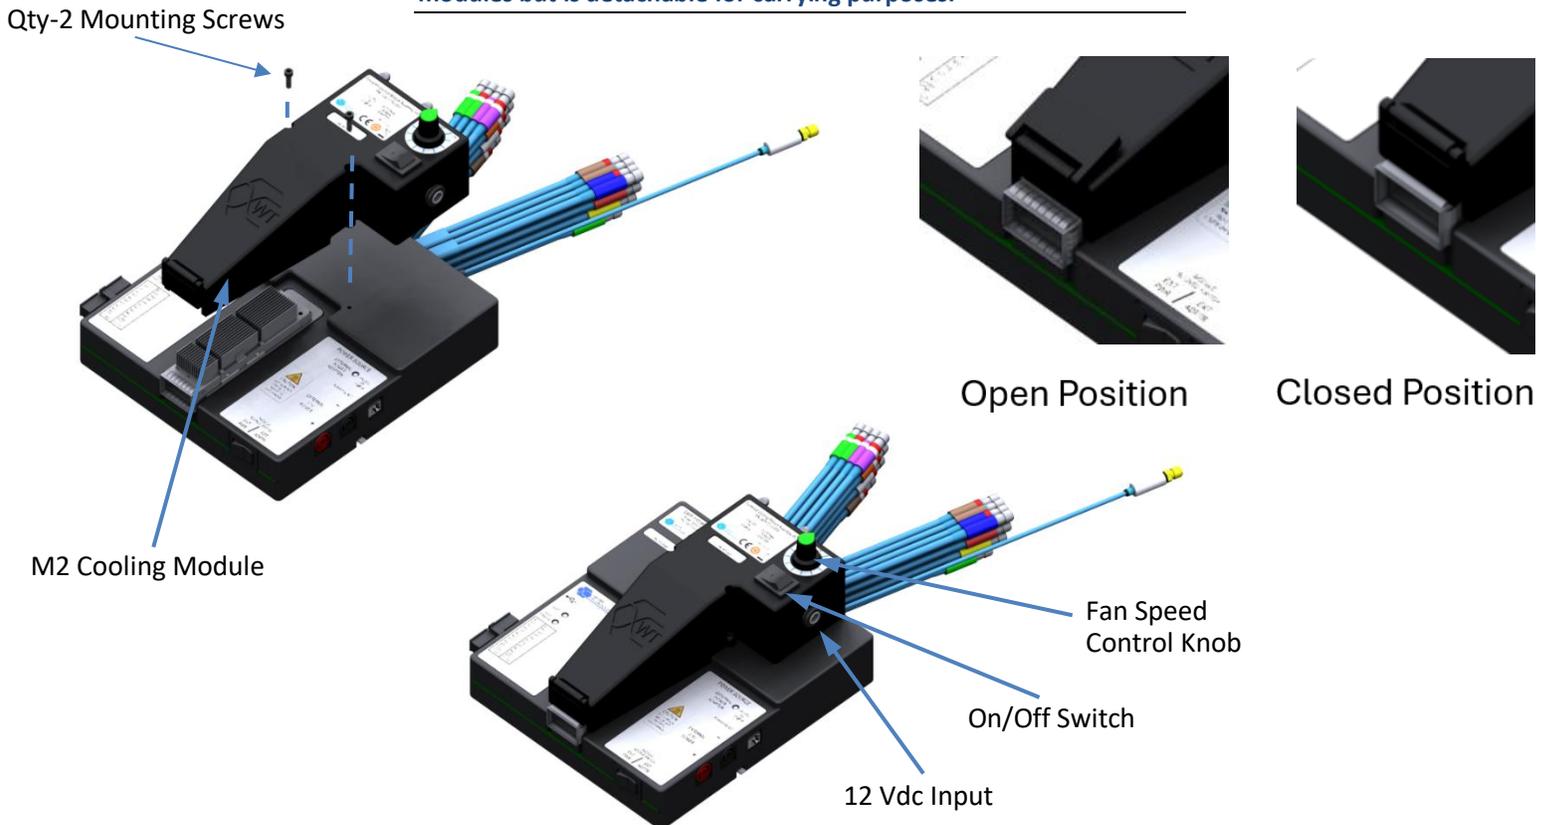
The OSFP MCB (Receptacle) Test Adapter with Cooling Module
